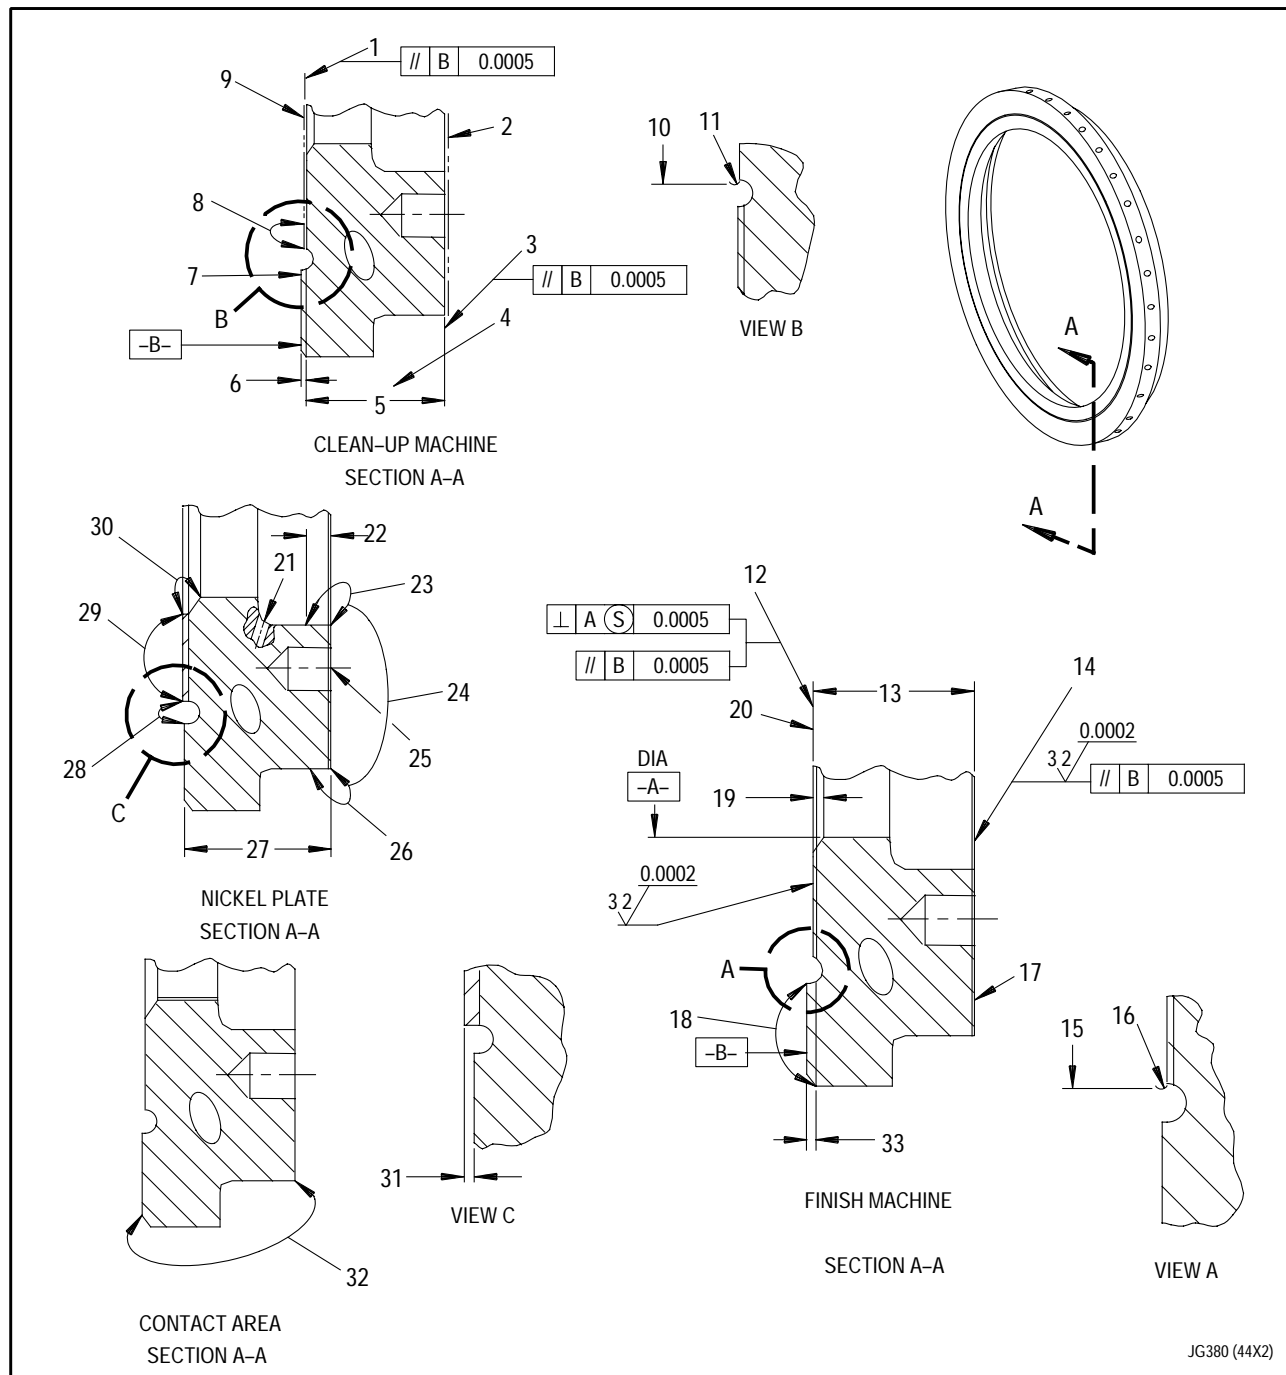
No. 2 Bearing Front Seal Seat - Nickel Plate Repair of Front and Rear Inner Faces
